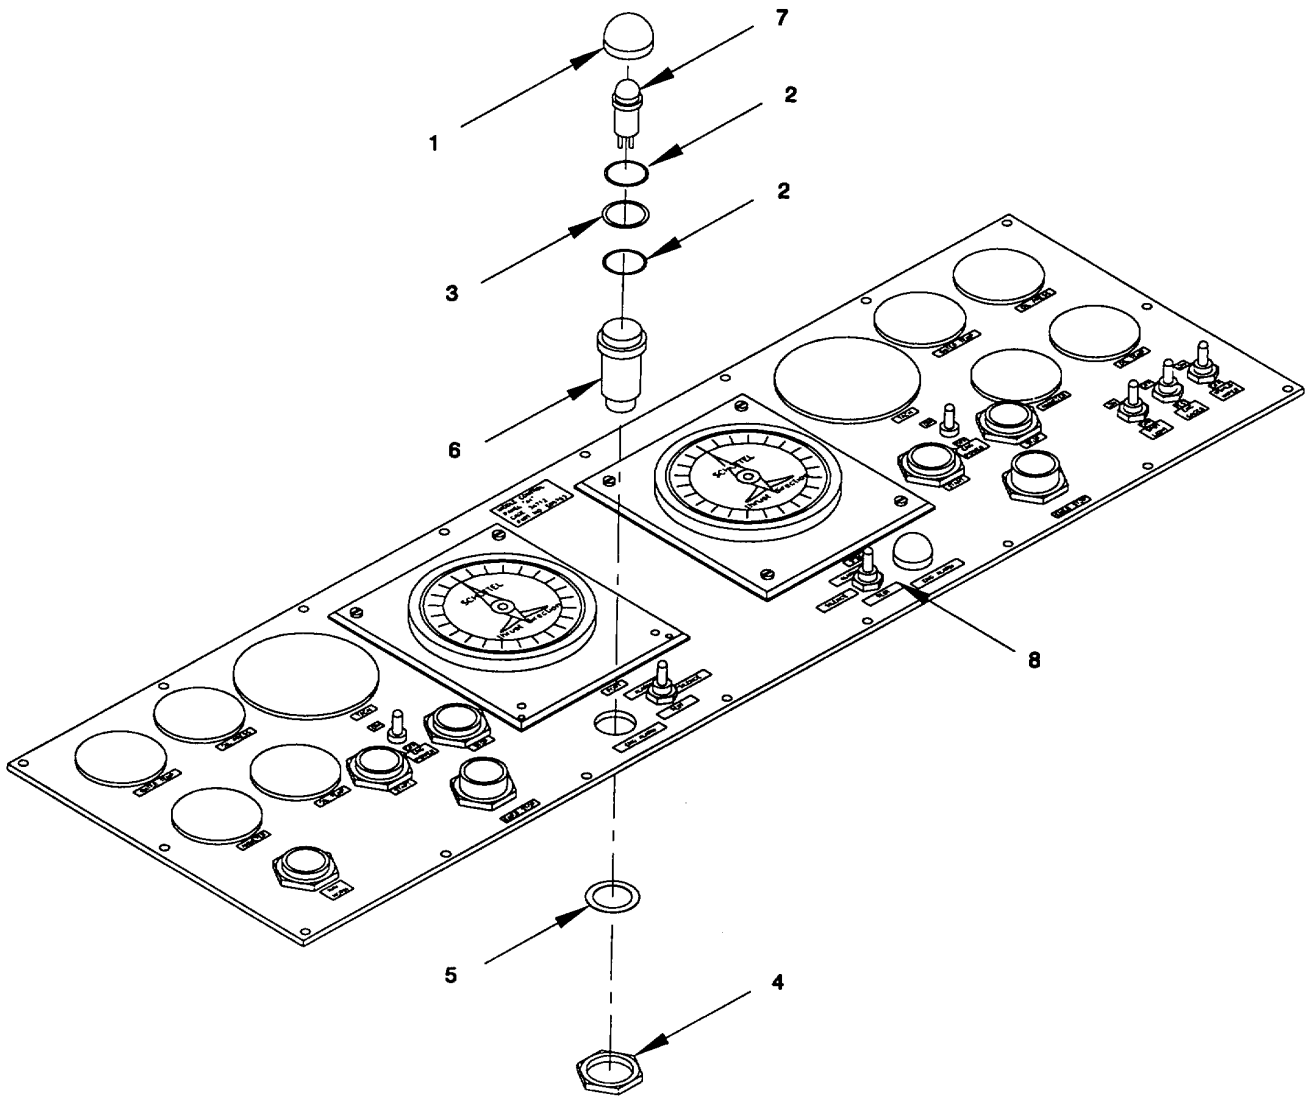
Engine Alarm Indicator, Middle Control Panel "A1", Remove/Install.
